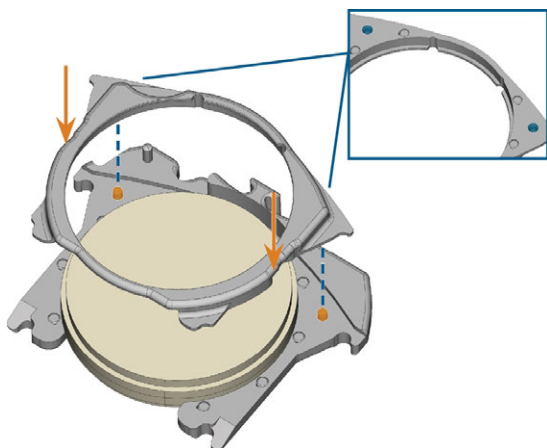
PLACING THE BLANK FRAME COVER (POSITIONING PINS MARKED ORANGE, RECESSES MARKED BLUE)
